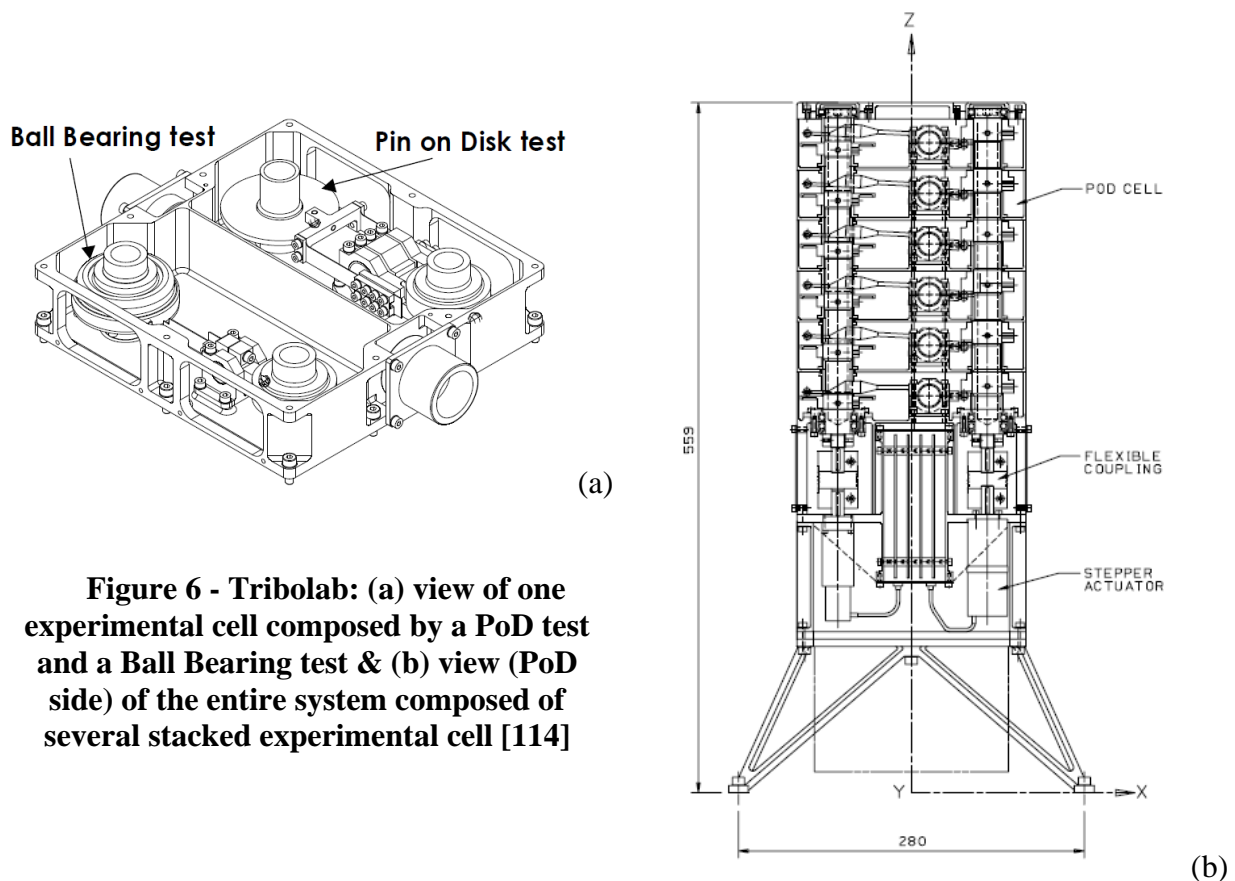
Tribolab: (a) view of one experimental cell composed by a PoD test and a Ball Bearing test & (b) view (PoD side) of the entire system composed of several stacked experimental cell [114]
